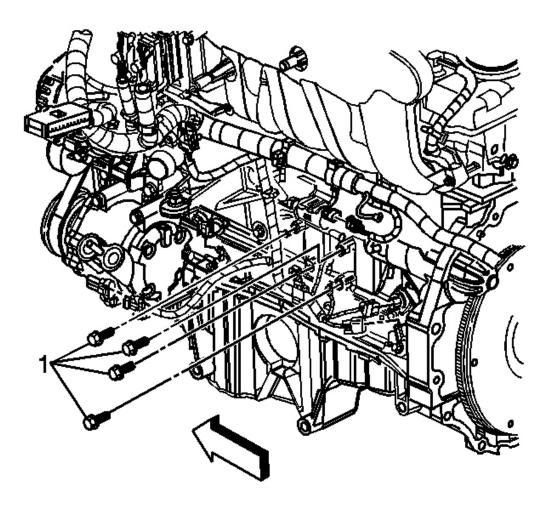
View Of Left Side Of Block Courtesy of GENERAL MOTORS CORP.
